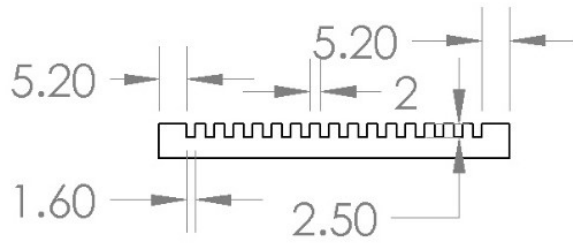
CAD drawing of aluminium base plate for 2mm channel width
